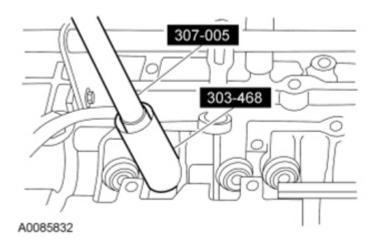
Removing Valve Seal Using Slide Hammer And Valve Stem Oil Seal Remover Courtesy of FORD MOTOR CO.
